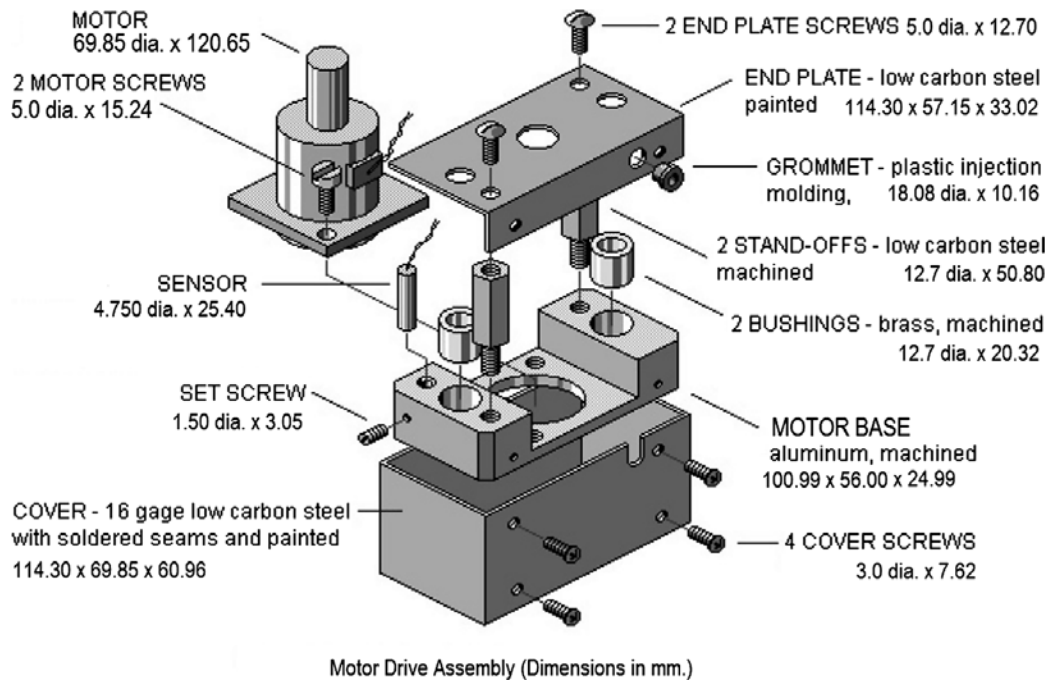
A motor drive assembly (Design for assembly user guide 2009)
